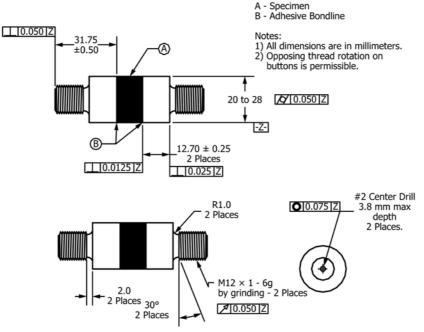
Drawing of End Tabs and Cylindrical Specimen Assembly (SI units)
